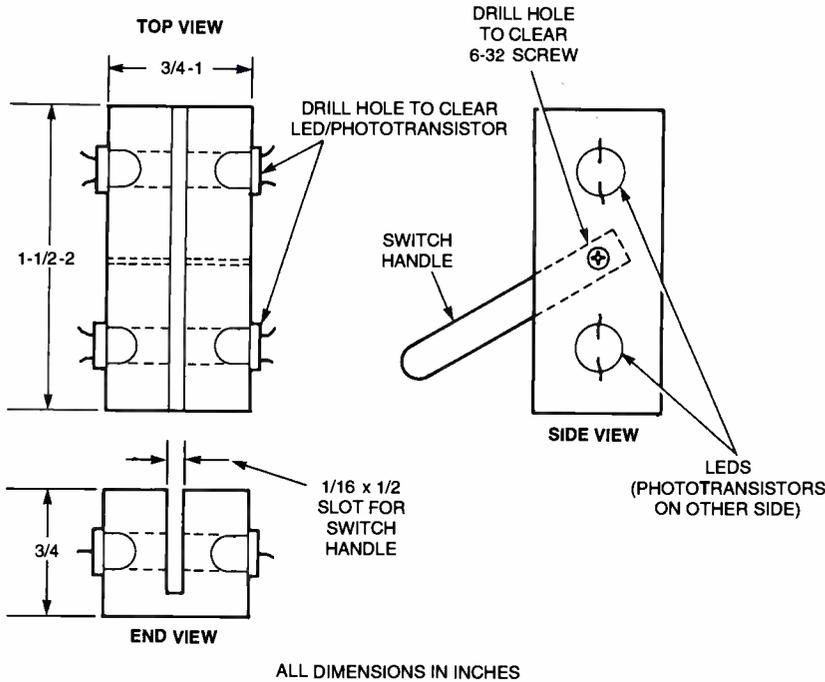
You can use infrared LED/phototransistor pairs in an optical switch. Throwing the handle to either extreme blocks one of the pairs. An advantage of this arrangement is that you can sense if the handle is only thrown half way.
